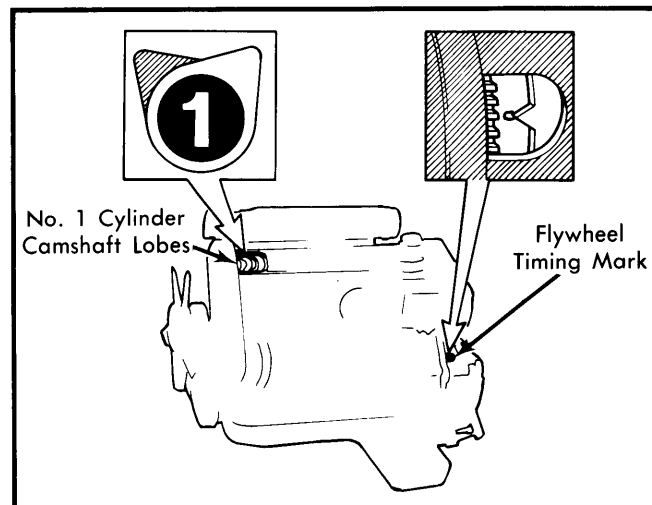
No. 1 Cylinder, Top Dead Center Reference Mark
